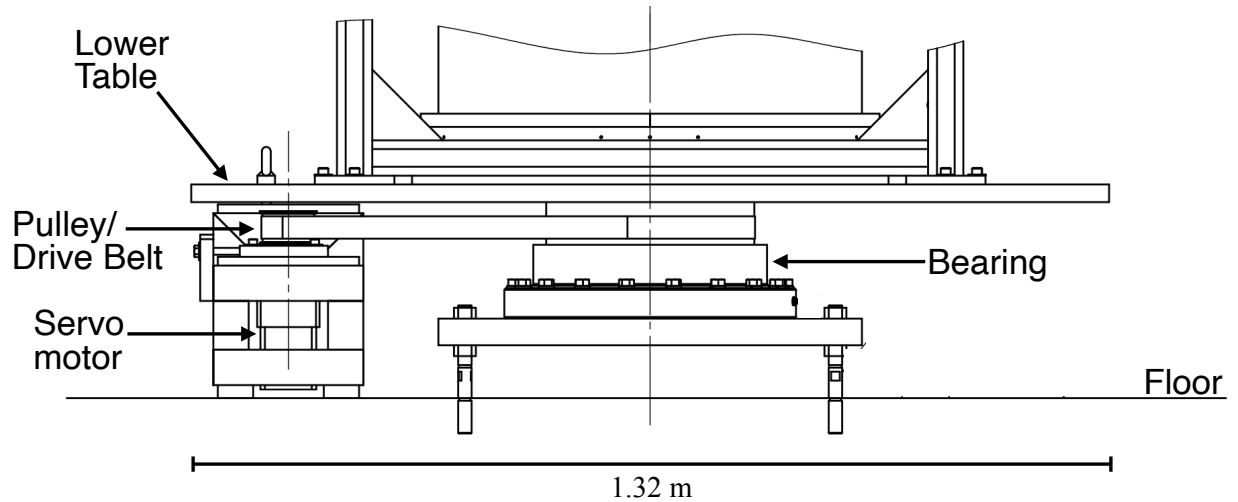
Side view drawing of the NoMag lower deck with labeled components. The diameter of the lower round turntable is 1.32 m. Drawing by Joel Neal.
